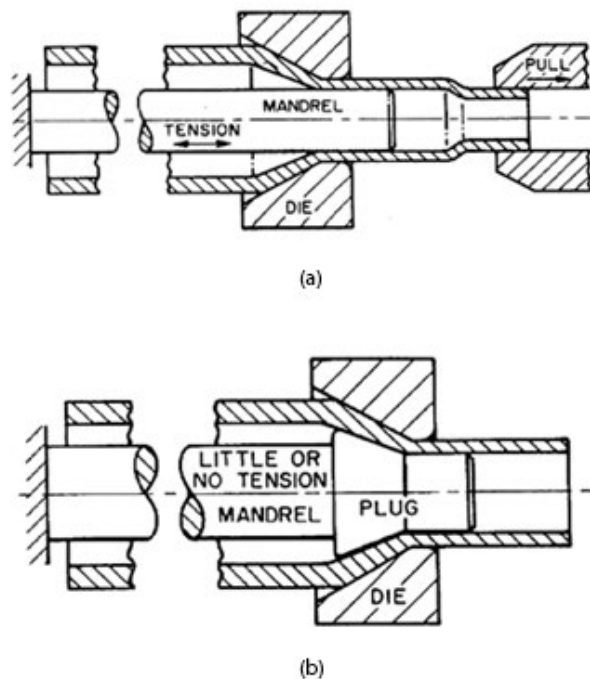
Tube drawing with (a) a fixed cylindrical mandrel and (b) a fixed plug [4.17].
